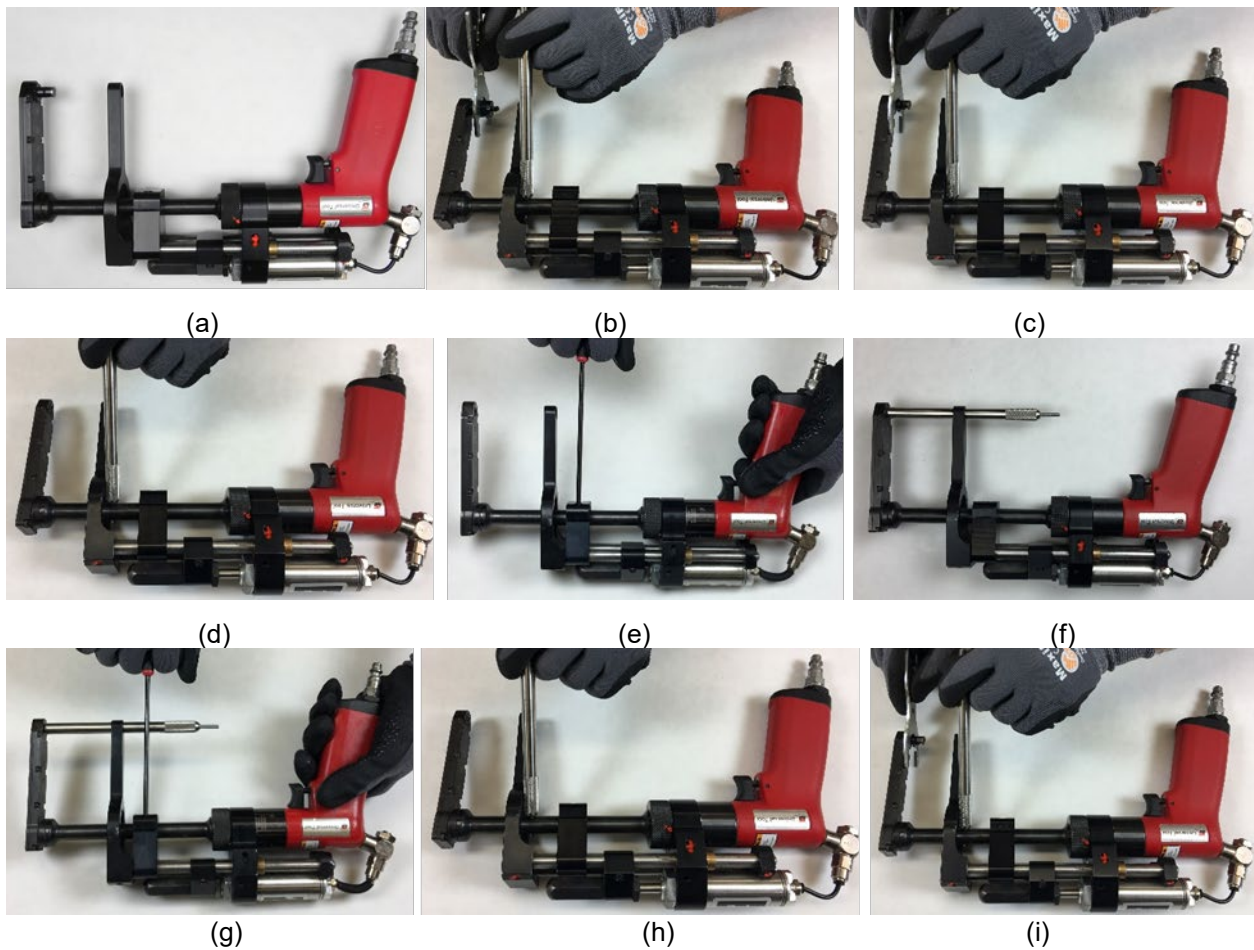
Steps for Proper Re-alignment of ATC Surface Preparation Tool
